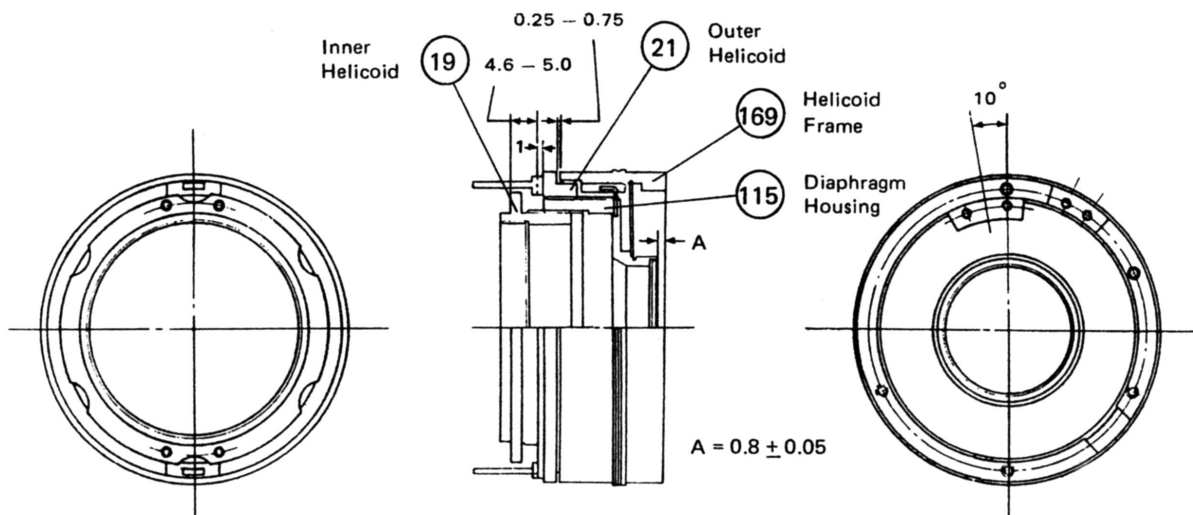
Helicoid Assembly Critical Dimensions, Pentax K Mount
